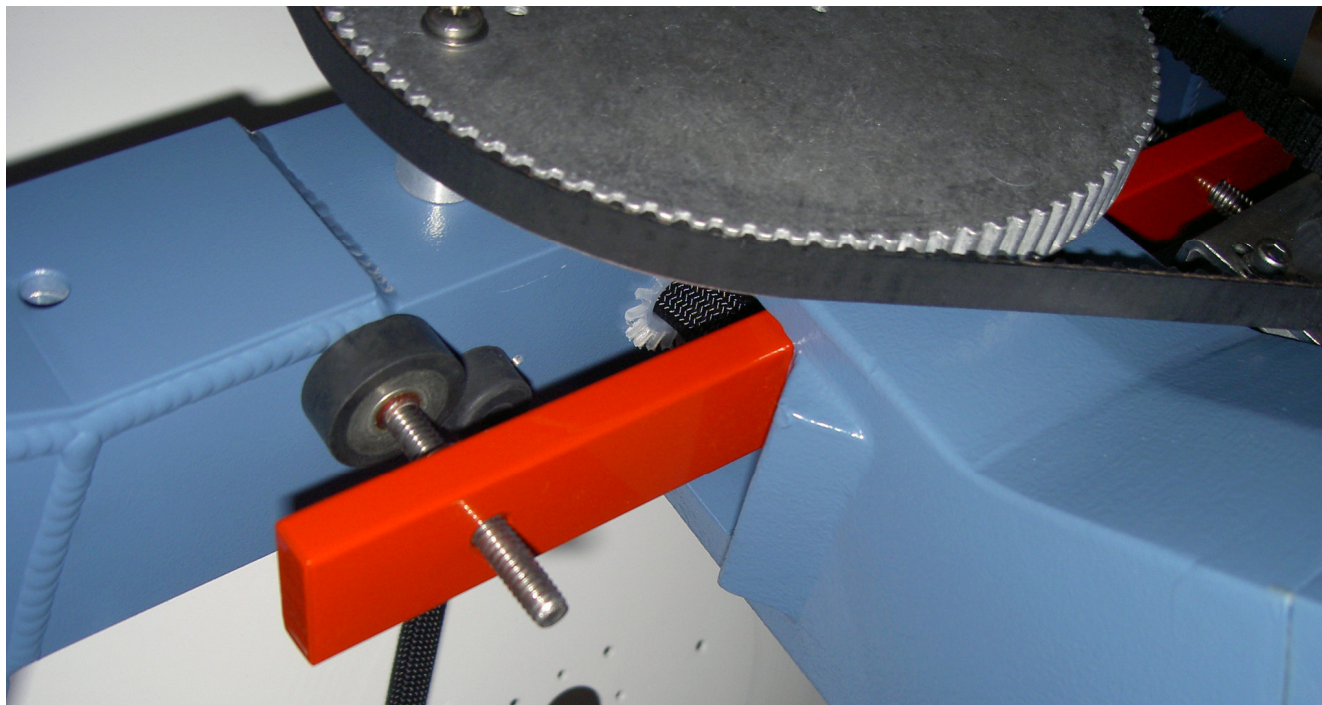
1/4 - 20 Screw Inserted into Right Elevation Bearing
